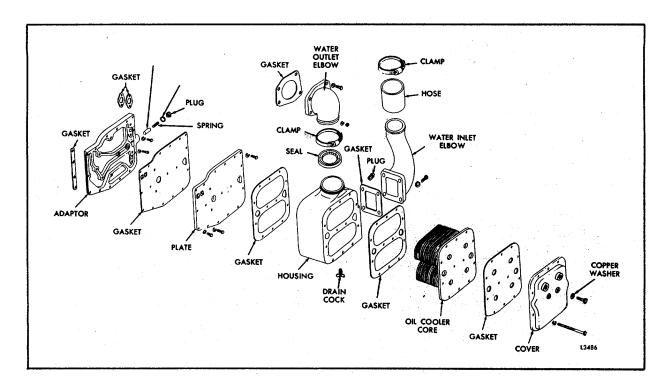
Twin Plate Oil Cooler Details and Relative Location of Parts
